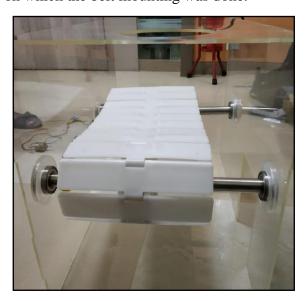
Conveyor and Shaft Assembly (Side View)
